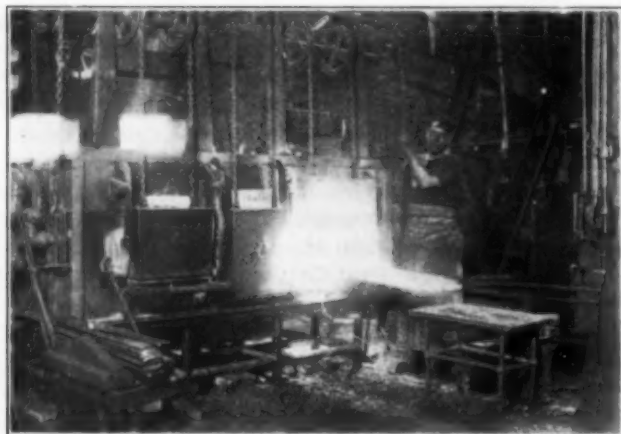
WELDING FURNACE IN OPERATION
